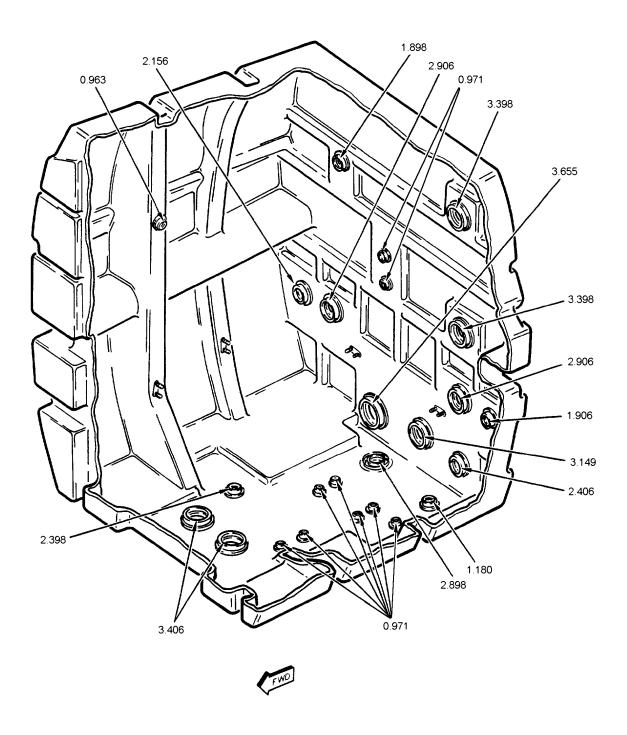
No. 2 Fuel Tank Inspection, Repair and Preparation (Sheet 1)
